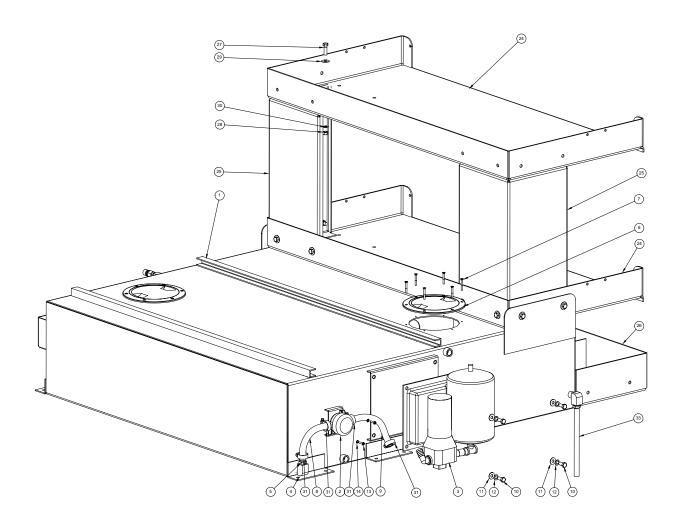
Horizontal Pump In Tank Assembly - Rear D-3700 Rev C
